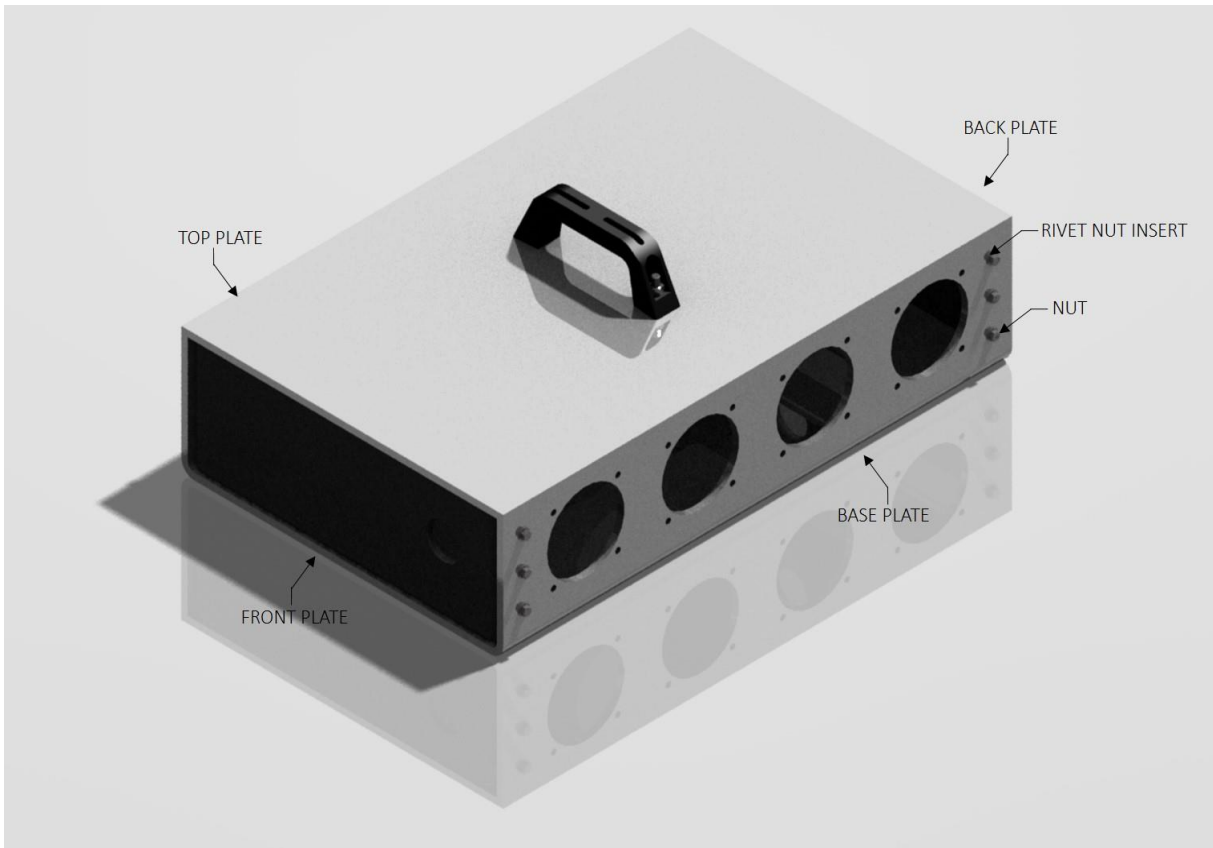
The isometric-view of the fully assembled ESS enclosure.
